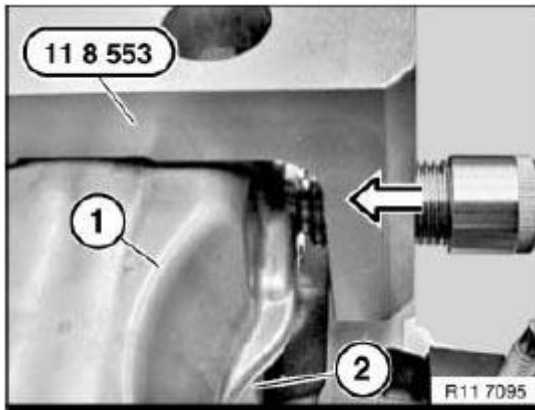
Tightening Screw Of Special Tool (11 8 553) To Ground Surfaces Of Lower Bearing Bank And Upper Bearing Bank
